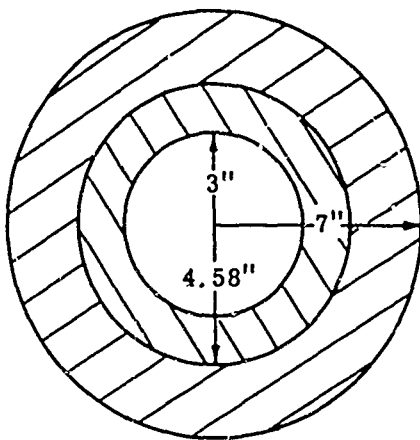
DESIGN OF DUMP TANK RECOIL SECTION
